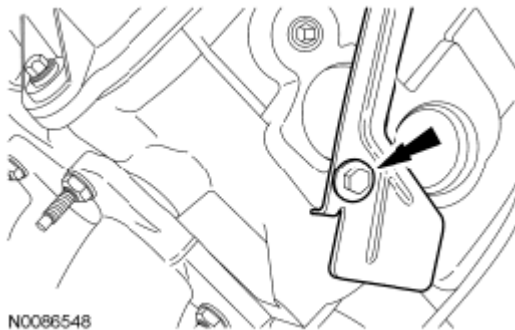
Locating Intake Manifold Vacuum Tube Support Bracket Bolt
